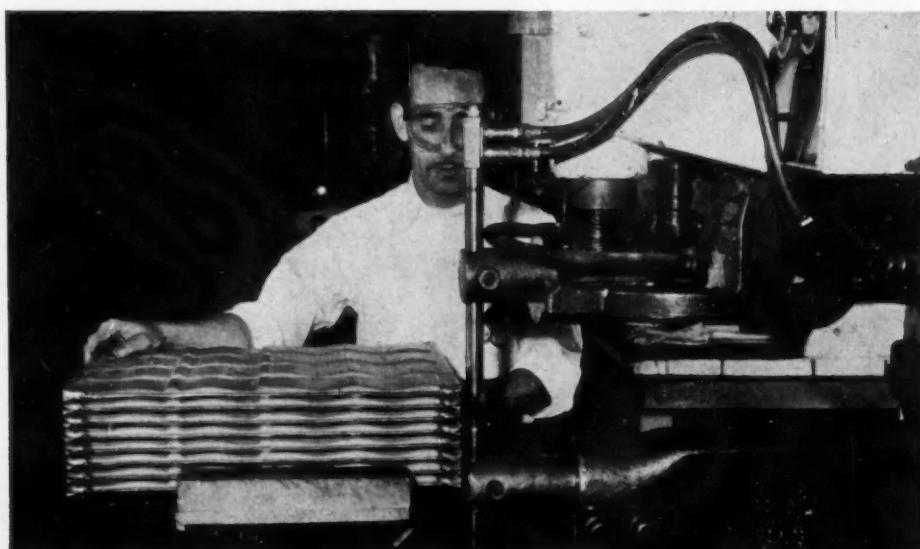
Electrodes of this spotwelder have less than  $\frac{1}{2}$ -in. clearance in this heat exchanger core. The machine makes 12 spotwelds per in., with the help of the automatic indexing fixture on which the assembly is mounted
